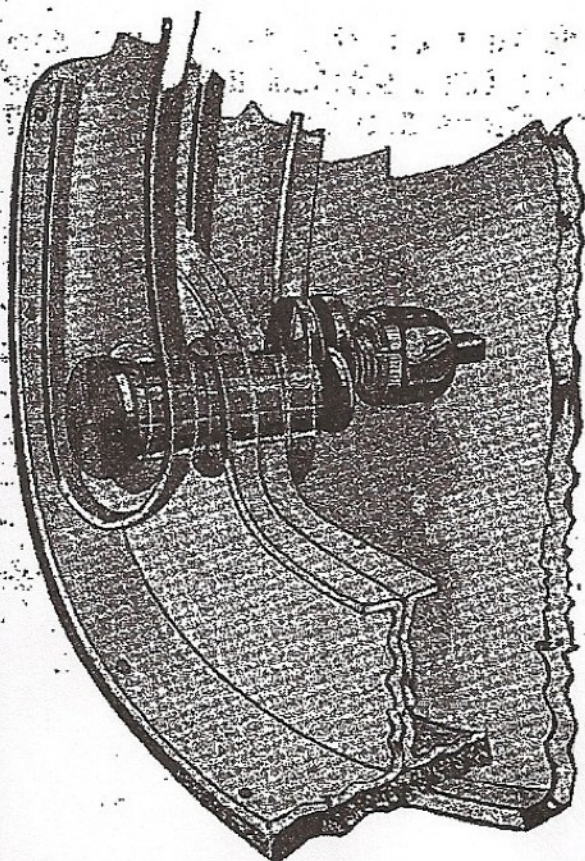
Phantom view of the eccentric or clearance adjustment used on most models
